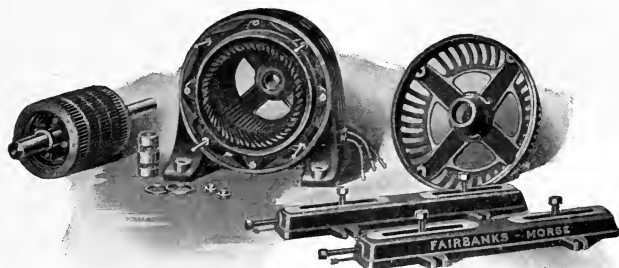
Unassembled Parts of Fairbanks Morse Induction Motor.
